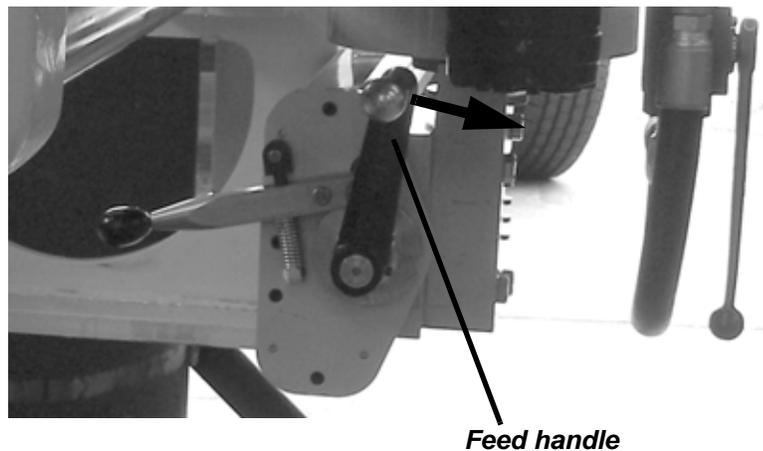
Turn the feed handle clockwise to retract the saw bow. (Note that the handle can be mounted on either end of the feed screw. Turn it
